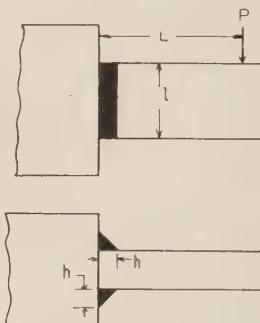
LONGITUDINAL FILLET WELDS LOADED IN BENDING
